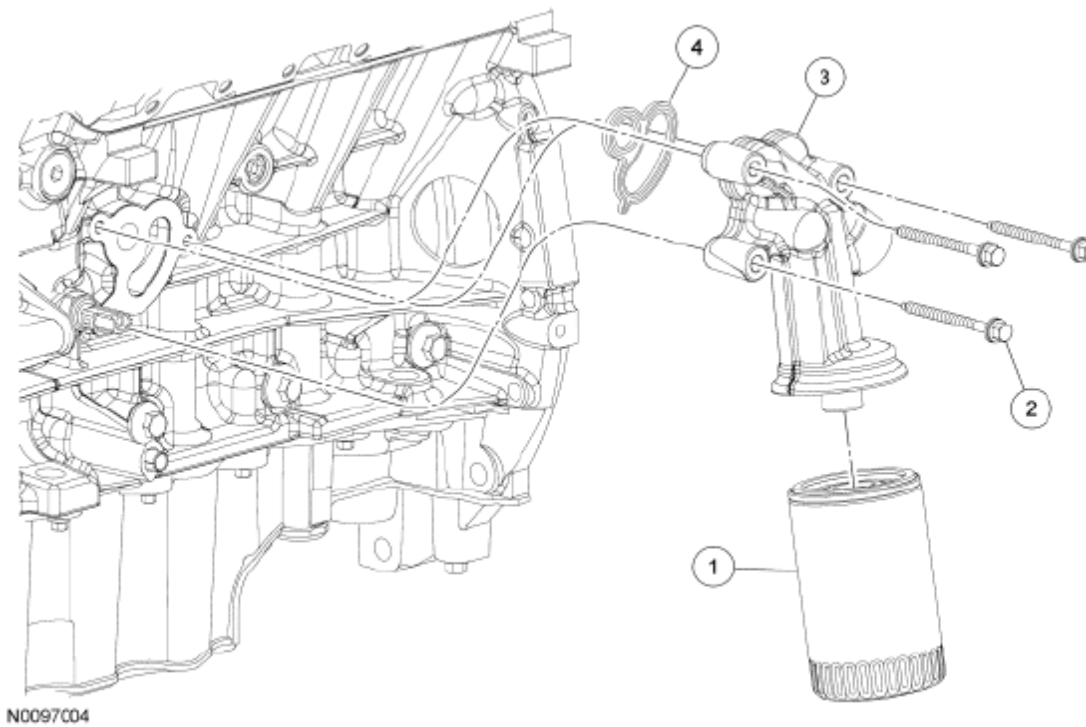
Identifying Oil Filter Adapter Components - Late Build Engines
